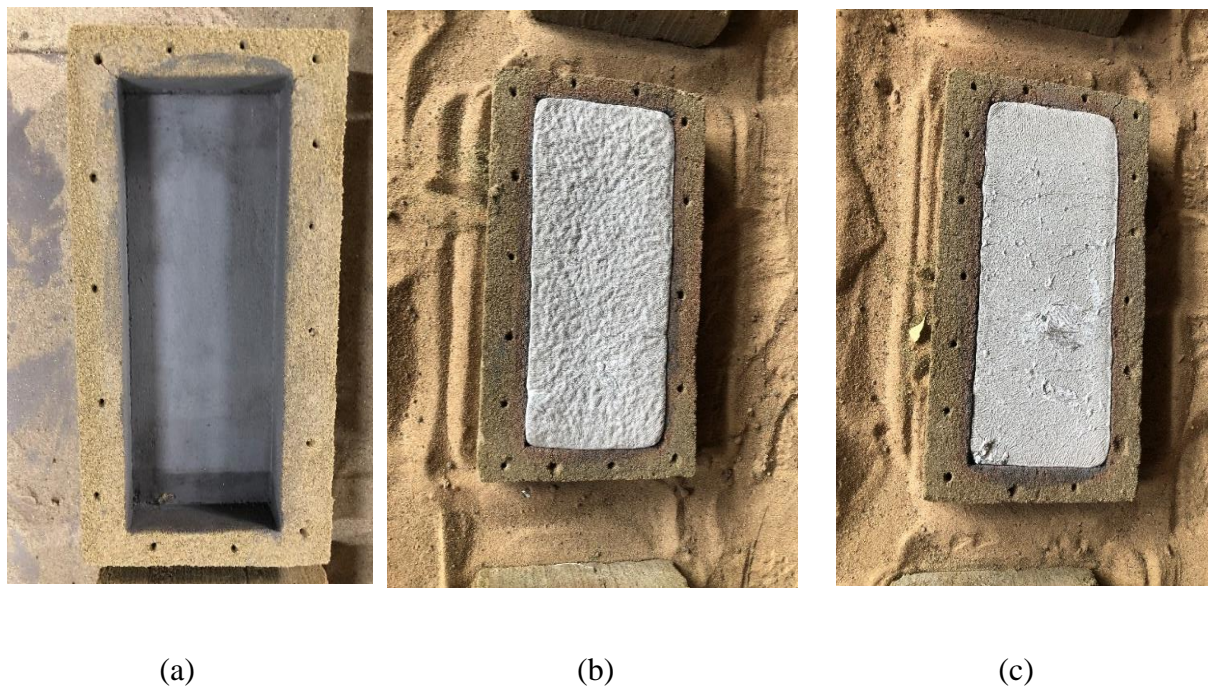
Sand Mold; (a) Empty, (b) Al MMC-1 pouring and (c) Al MMC-2 pouring.
